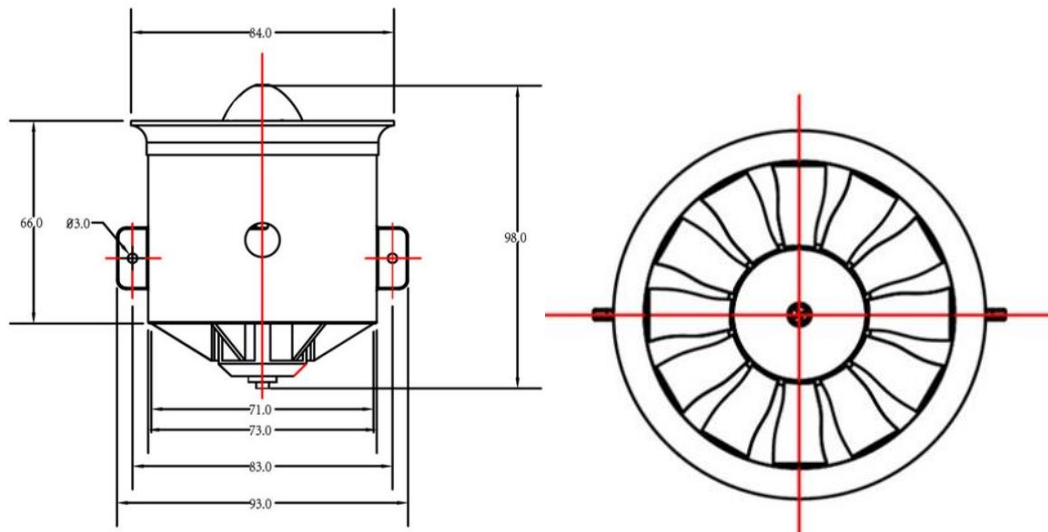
Constructional details of brushless DC motor mounted EDF unit
